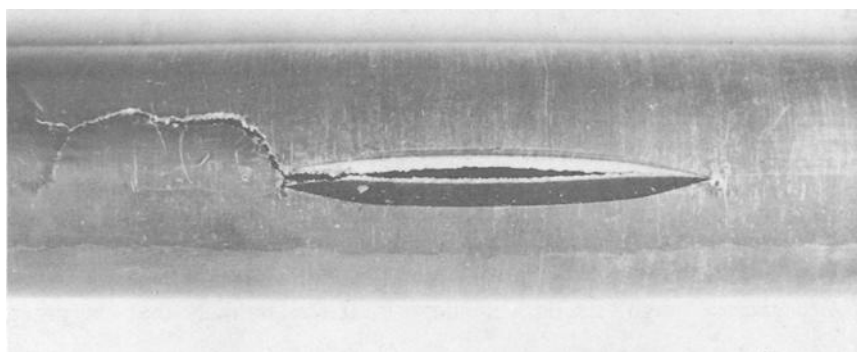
Specimen Y-1 HAZ, tested at 0°C, showing ductile failure in notch with a brittle fracture extending 6 to 7 cm into the base metal.
